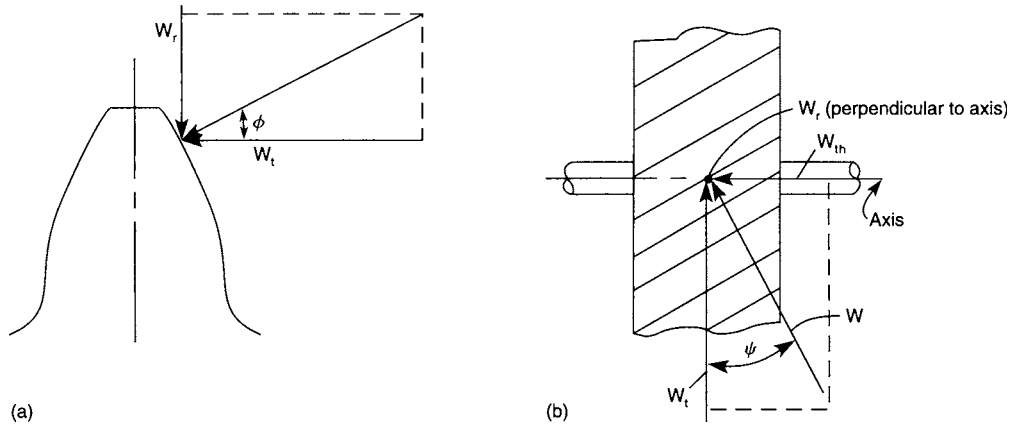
Forces on spur and helical teeth. (a) Spur gear; (b) helical gear.
